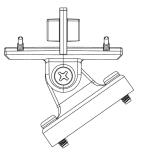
RAPID RAIL CONTINUOUS STAIR BRACKET
